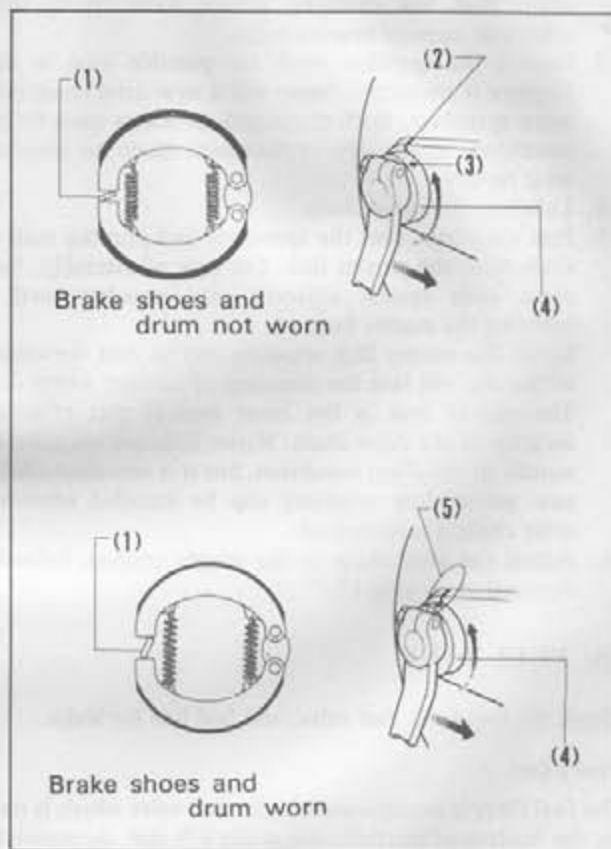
(1) Brake cam (2) Index mark (3) Arrow mark (4) Brake indicator plate (5) Wear limits
